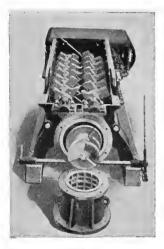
Tile machine. This machine mixes the clay and forces it through a die onto the table shown in Fig. 17.
